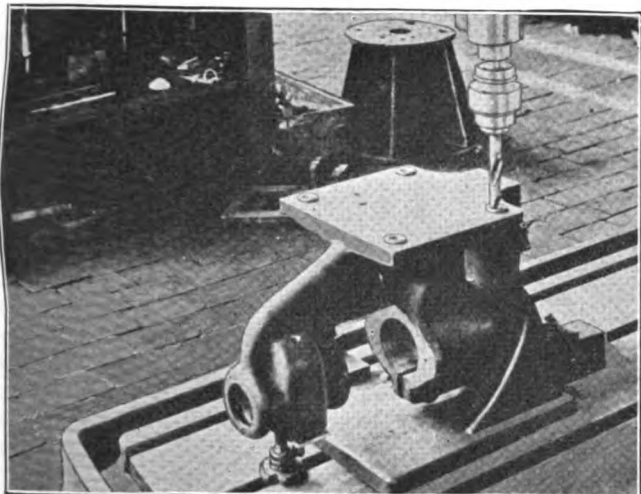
DRILL JIG FOR PUMP BRACKETS.
